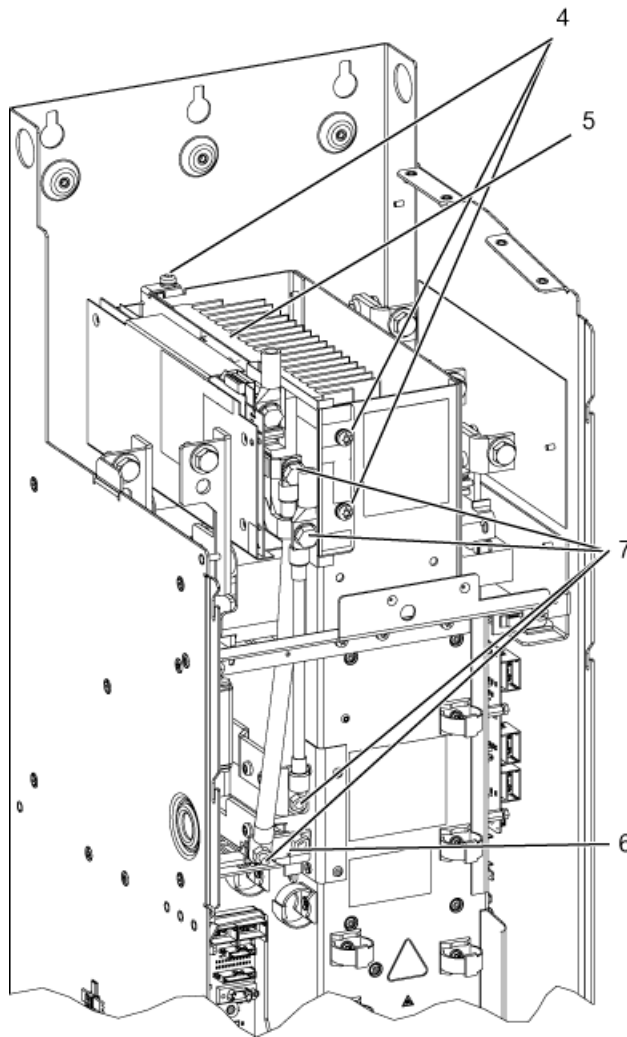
Installing the Braking Module in an Active Line Module / Motor Module, frame size FX – steps 4 - 7
